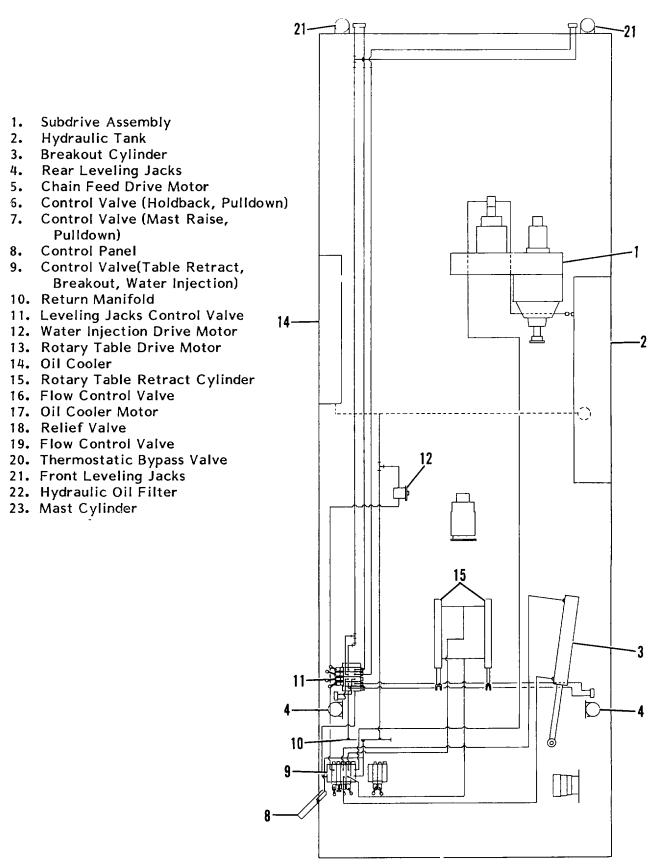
Hydraulic Piping (Sheet 1 of 2)
